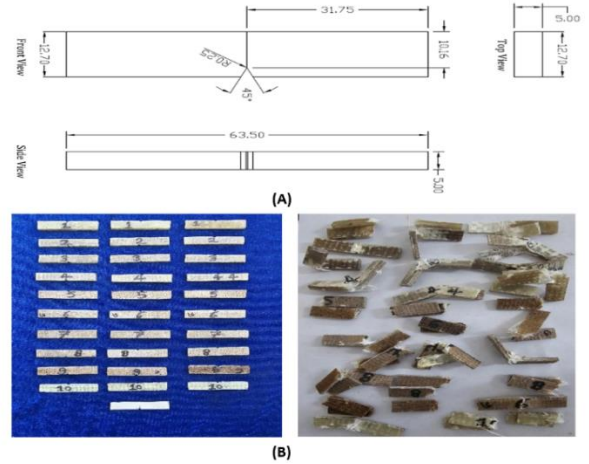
(A) Test Specimen Design as per ASTM 256 Standard (B) Test Specimen Before and After Impact Test
